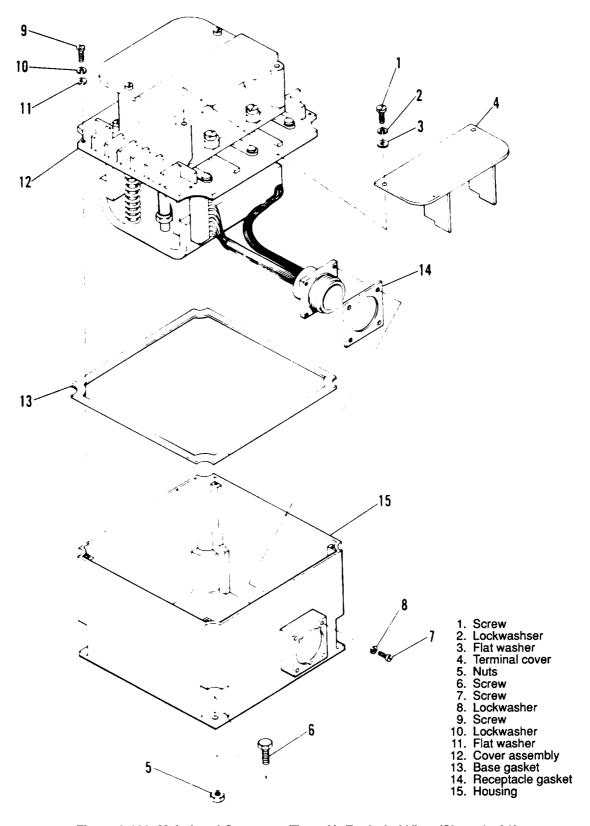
Main Load Contactor (Type A), Exploded View (Sheet 1 of 3)
